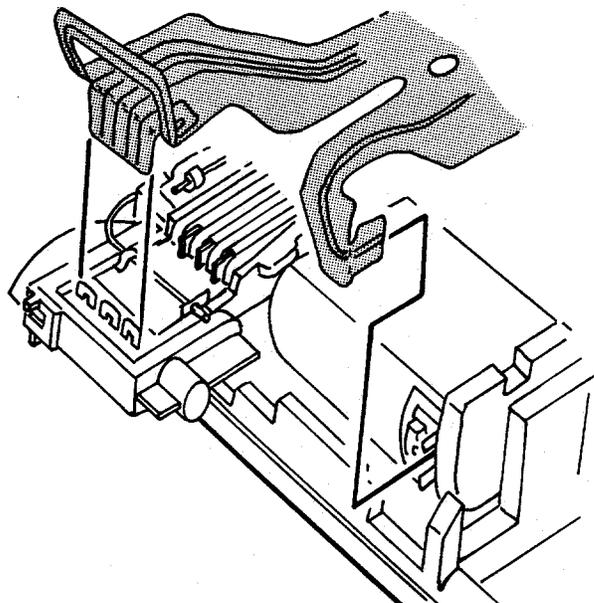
Reconnecting Flex to Contact Support Block, Motor and Wire Block Assembly
